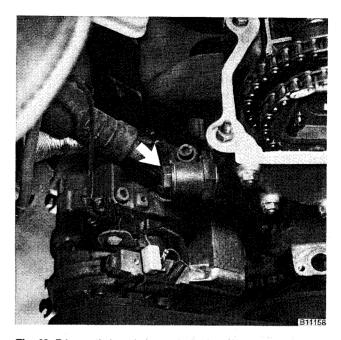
Primary timing chain tensioner (arrow). Remove tensioner slowly to relieve spring tension beneath end plug.
